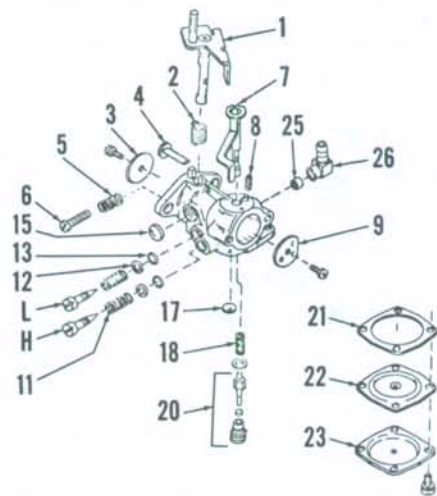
Exploded view of typical Tecumseh diaphragm carburetor. Gravity feed models will not have parts (4, 25 & 26).
